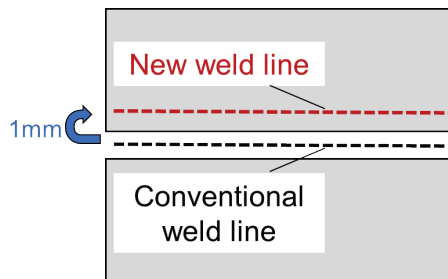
Shifting weld line 1mm away from the center of gap.
